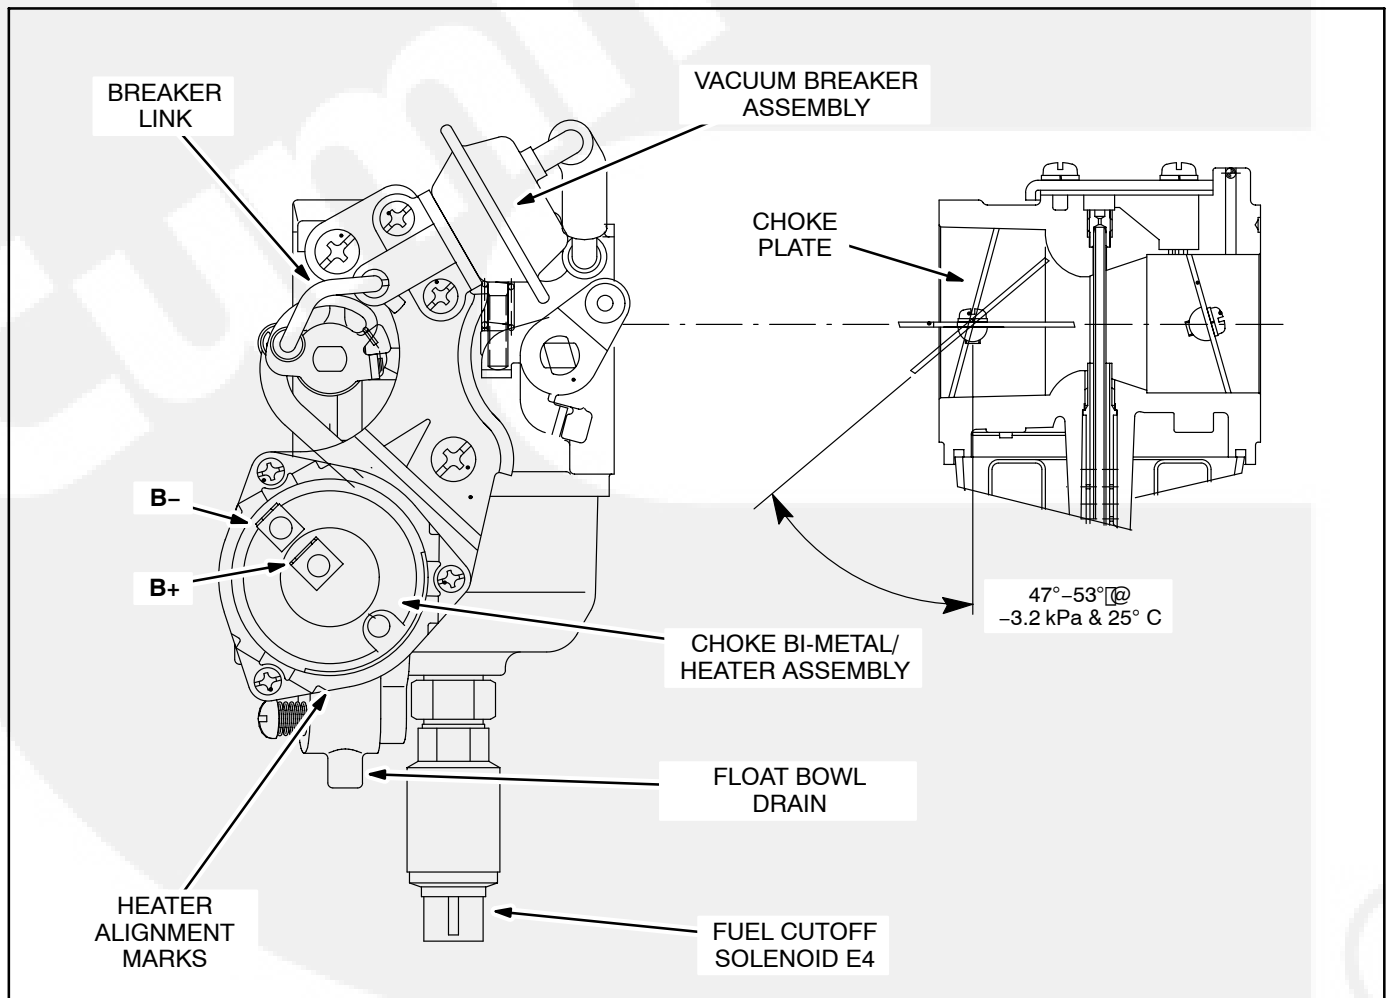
CARBURETOR / CHOKE ASSEMBLY
